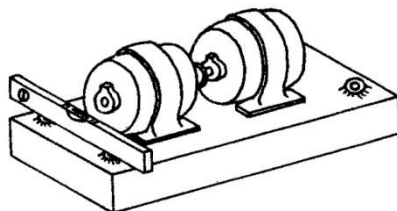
CHECKING MACHINE BED FOR LEVEL.
